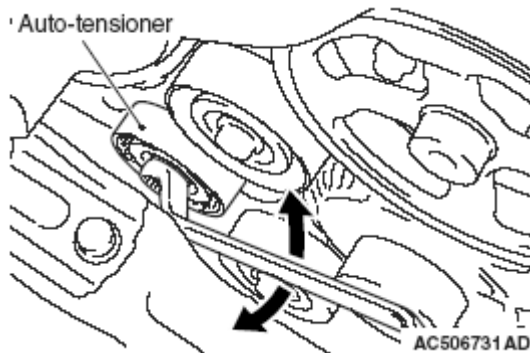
Rotating Pulley Bolt Of Auto-Tensioner Counterclockwise
